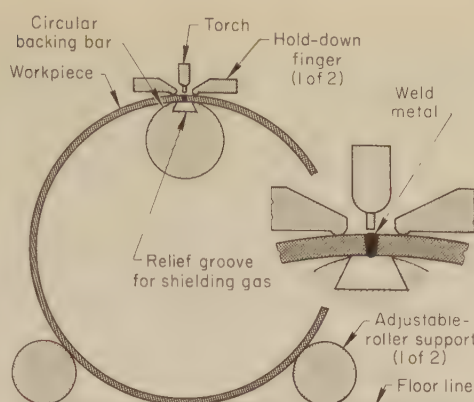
Setup for automatic welding of longitudinal butt joints (see text)
